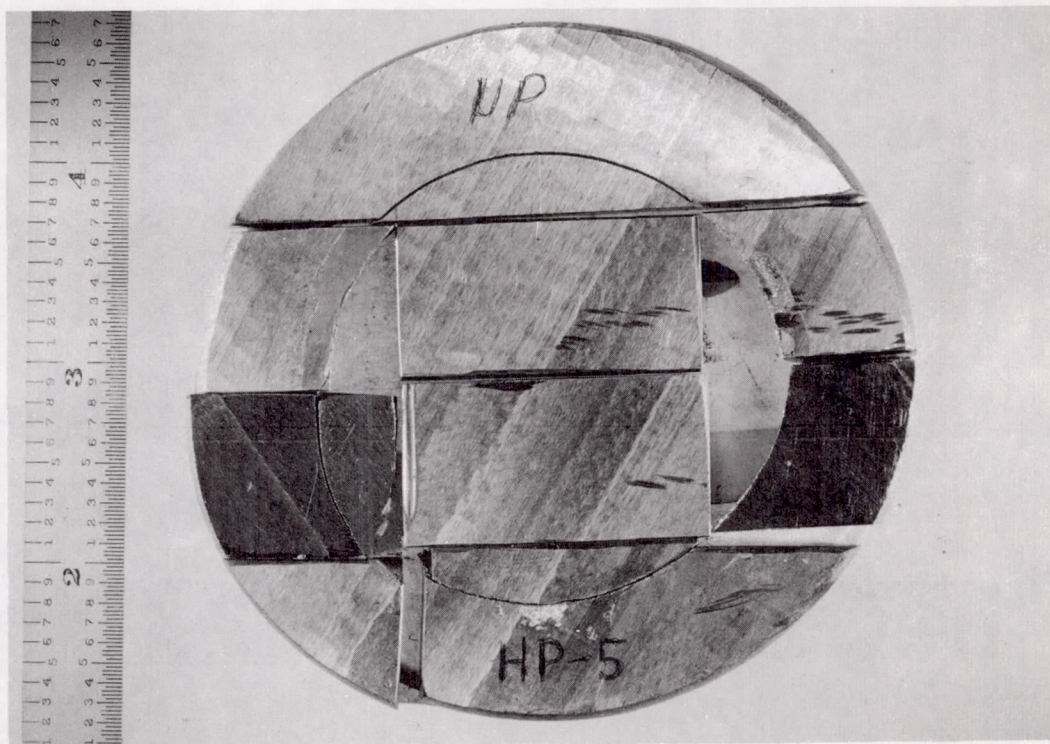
Sectioning of Hot Press Compact HP5. Hot Pressed at 2200°F/2 hrs/Vac from Prealloyed Flake Shaped Powders (Cr-4Mo-.15(La+Y)-4ThO₂) Small Pieces Were Used to Investigate Rolling Parameters
